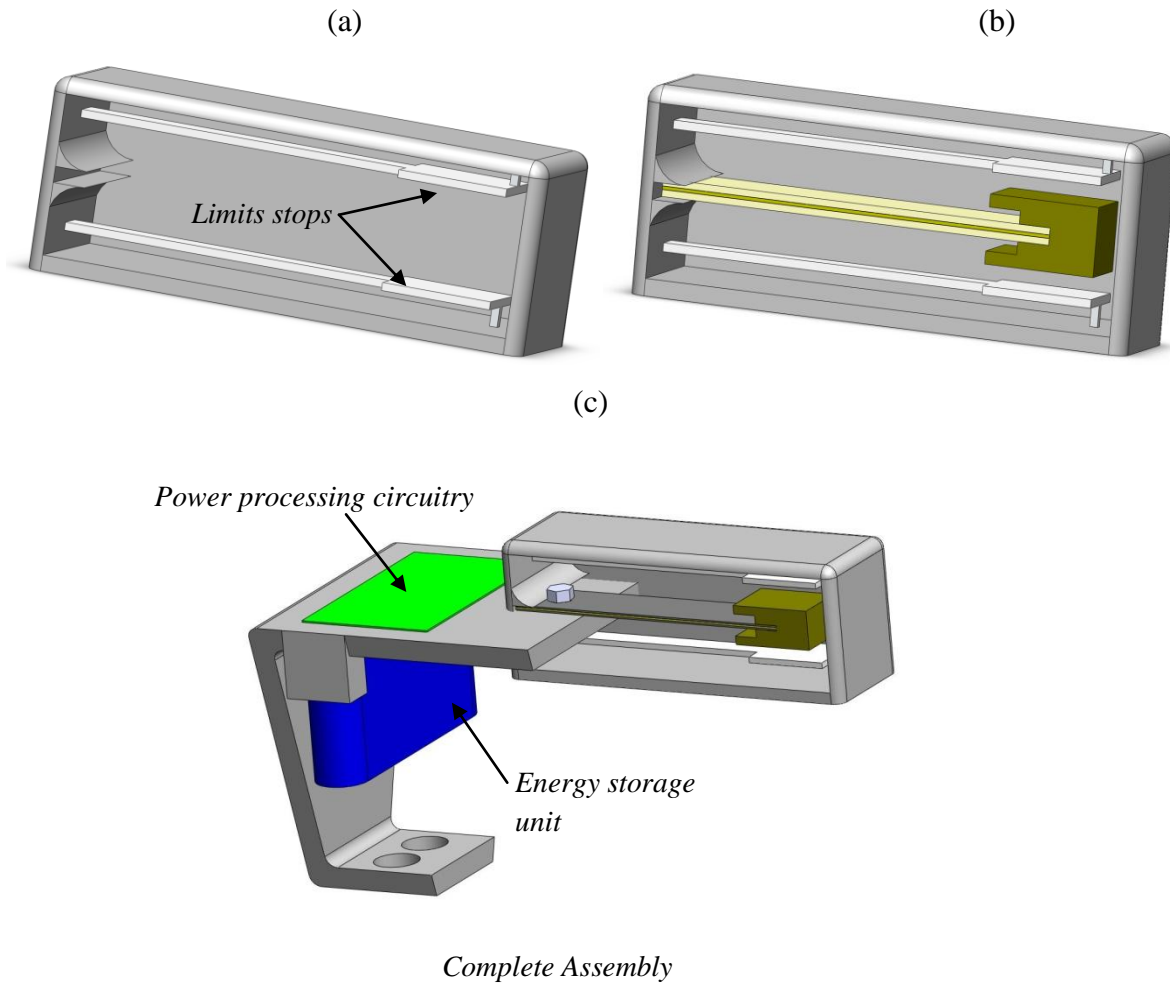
(a) CAD drawing of the harvester casing, (b) drawing of the harvester placed inside the casing, and (c) drawing of the complete assembly. (Note: some components removed from model for clarity)
